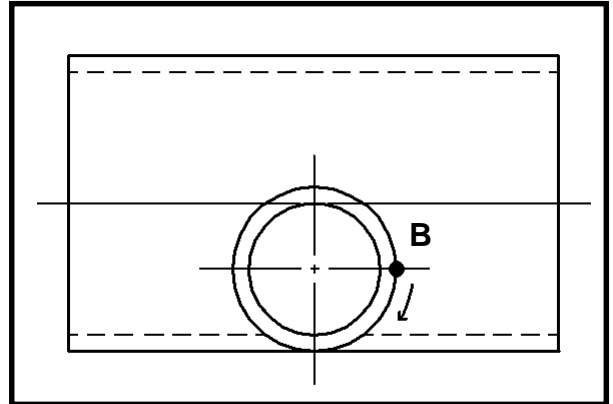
Weld Starting Position for Offset or Hillside nozzles.
